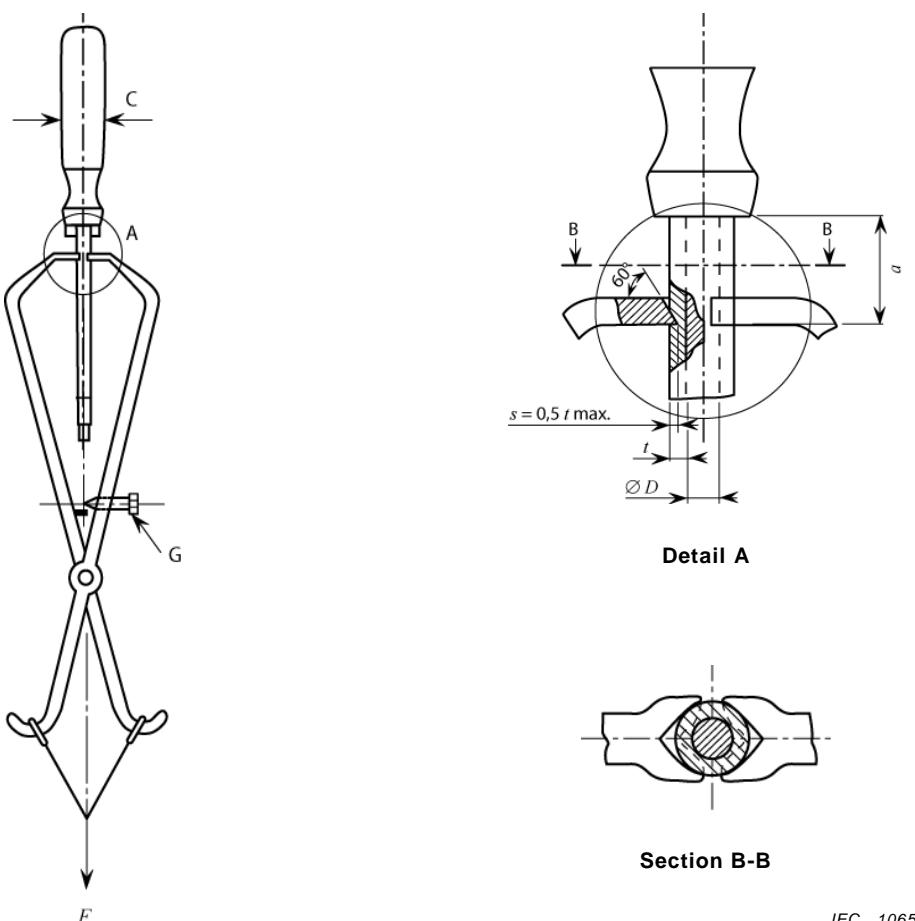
Principle of the testing device for checking adhesion of the insulating coating on conductive parts of the insulated hand tools – Test on the working head – Method B
